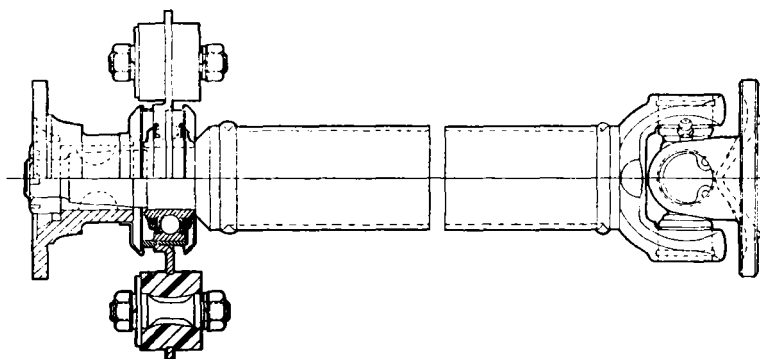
Front propeller shaft and centre bearing—Automatic transmission model.
